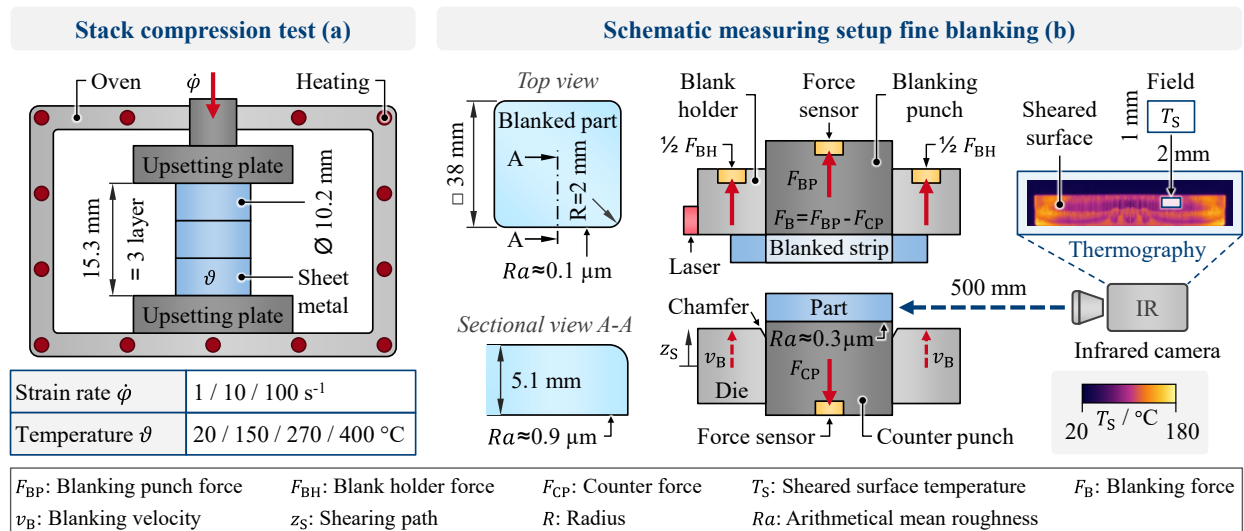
Setup for stack compression tests (a) as well as thermomechanical measuring setup for fine blanking (b)
